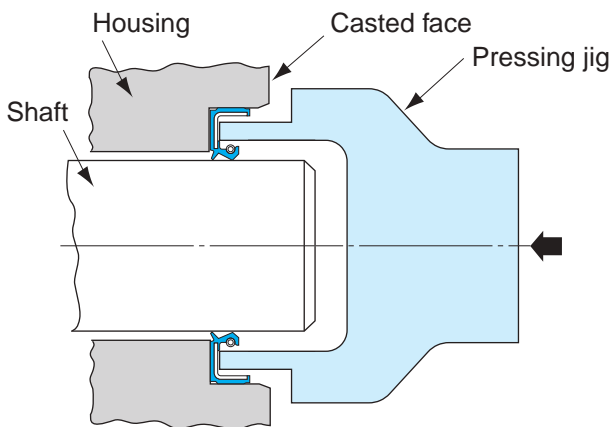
Seal press-fitting jig for shouldered housing bore in the opposite direction
